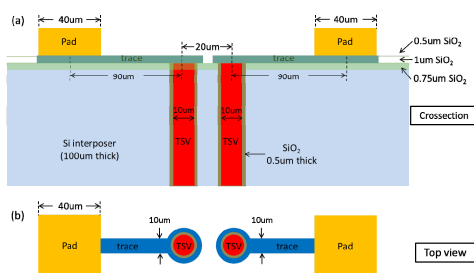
(a) Top view and (b) cross-section of pads, traces, and TSVs with dimensions.
